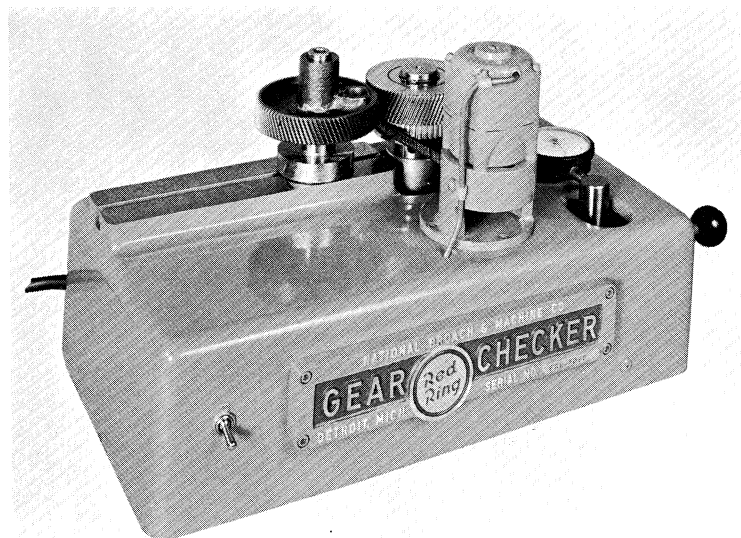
The Model GRH rolling fixture equipped with a motor drive.
